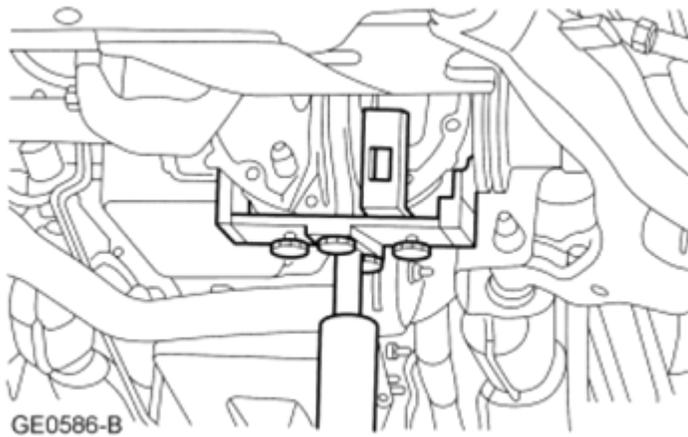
Positioning Suitable Hydraulic Jack Under Front Axle
